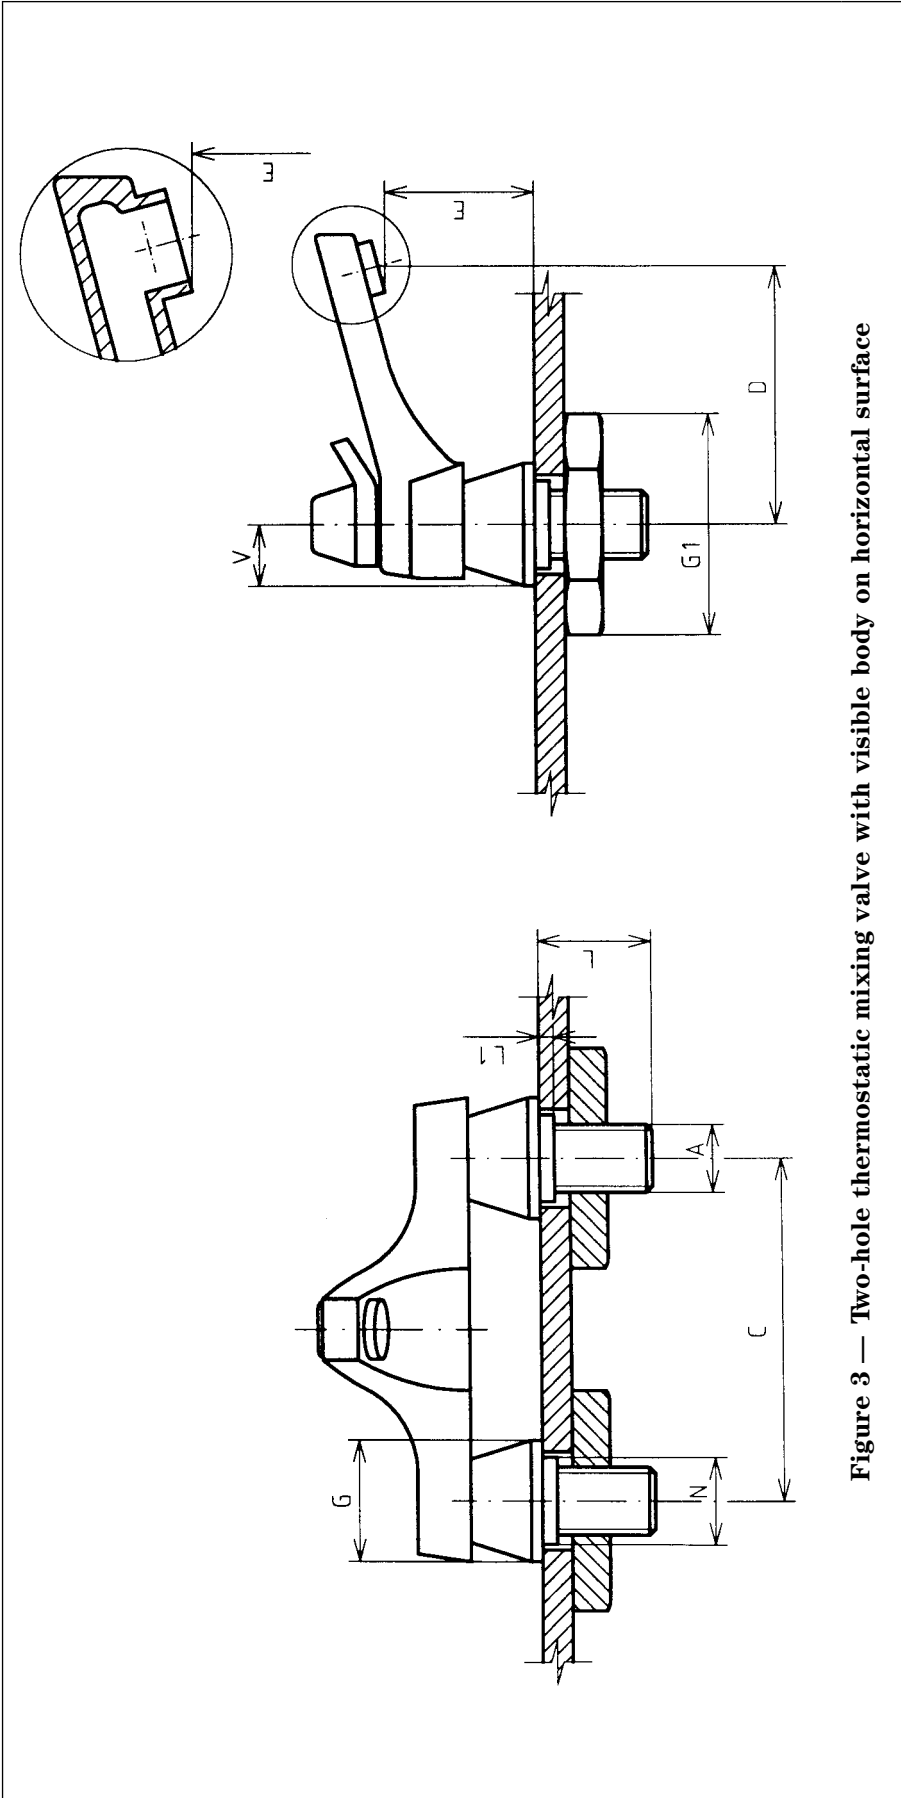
Two-hole thermostatic mixing valve with visible body on horizontal surface
